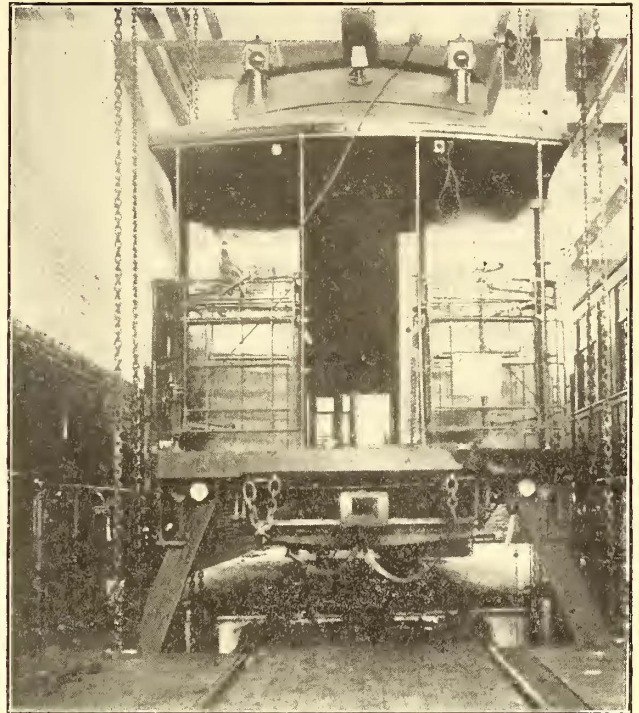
WOODEN STRUTS USED IN THE EAST NEW YORK SHOPS TO HOLD UP CAR OVER ELEVATOR WHILE TRUCK IS BEING REPLACED BY A DUMMY
